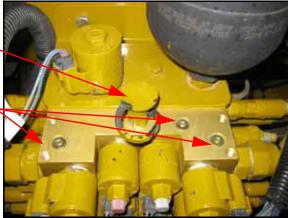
Machine's Hydraulic Valve Before AutoBoom Installation
